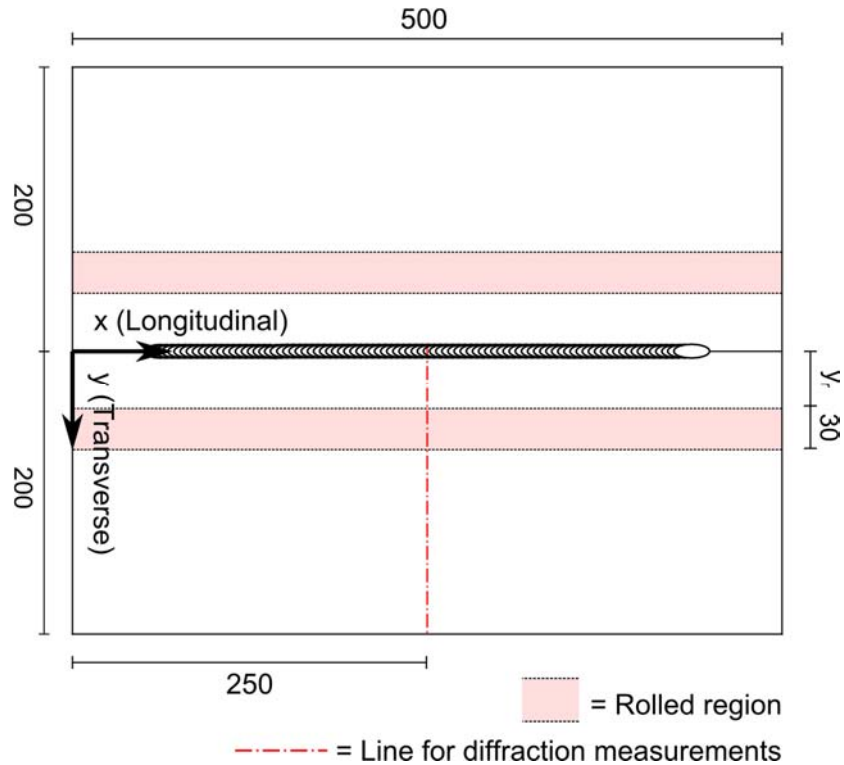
A completed weld comprising two individual plates rolled prior to welding at a distance y_r from the plate edge.
